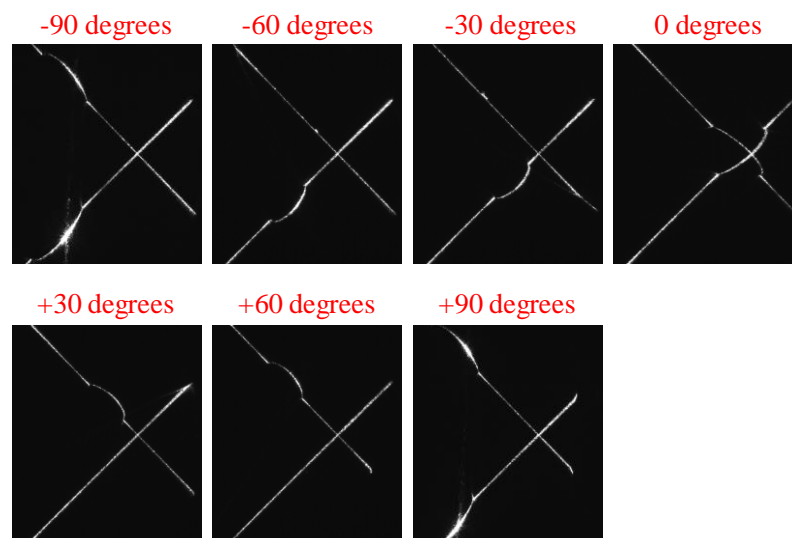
Image of crossed line beams on a weld bead. Measurement directions are 0, ± 30 , ± 60 and ± 90 degrees.
